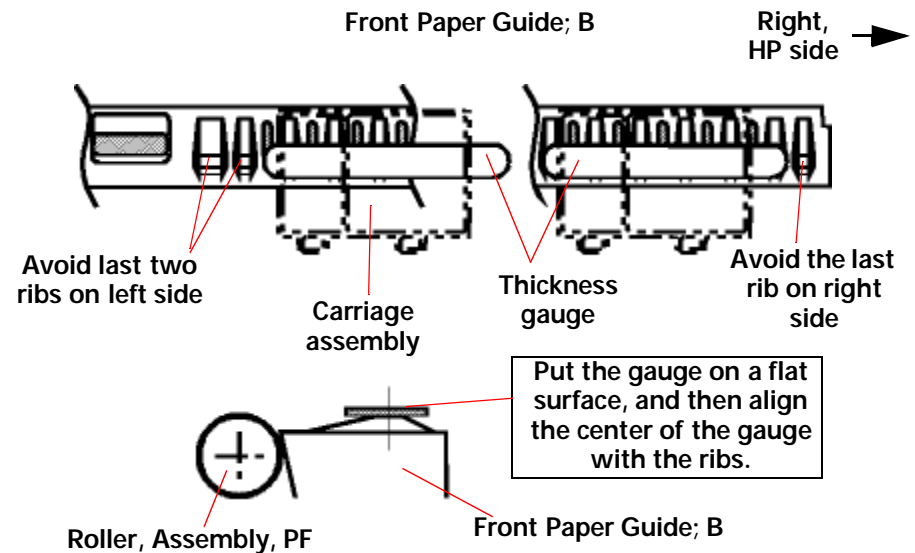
Setting the Parallelism-Adjustment Gauge
